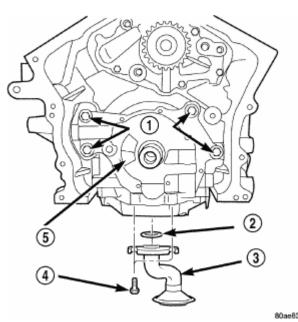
Identifying Oil Pump & Pick-Up Tube Courtesy of CHRYSLER LLC
